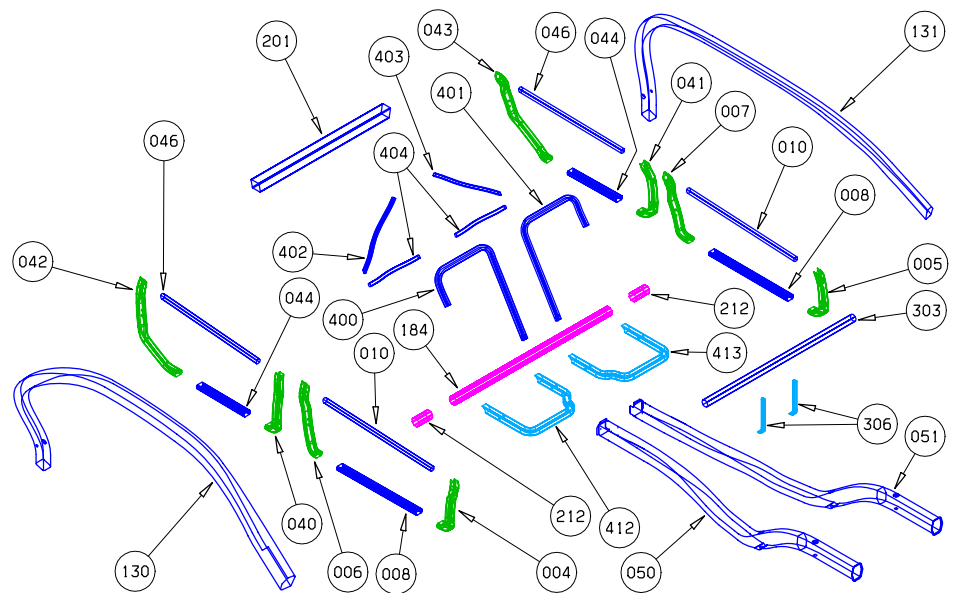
Exploded view PNGV-Class tubes (chassis parts not shown)
